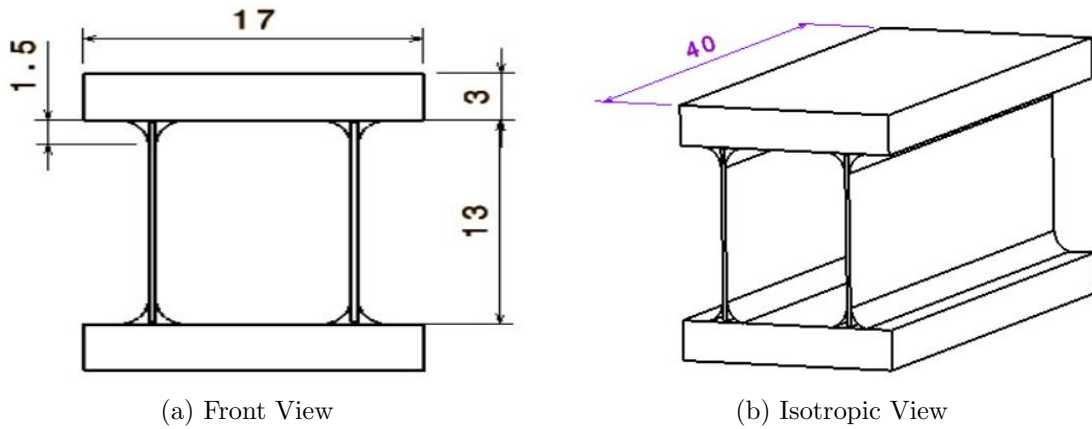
Shear Sample Geometry and Coupon Dimensions
